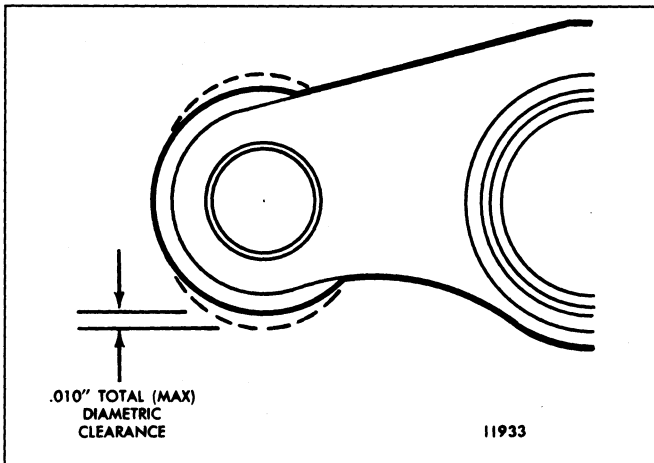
Rocker Arm Roller Wear and Clearance Diagram
